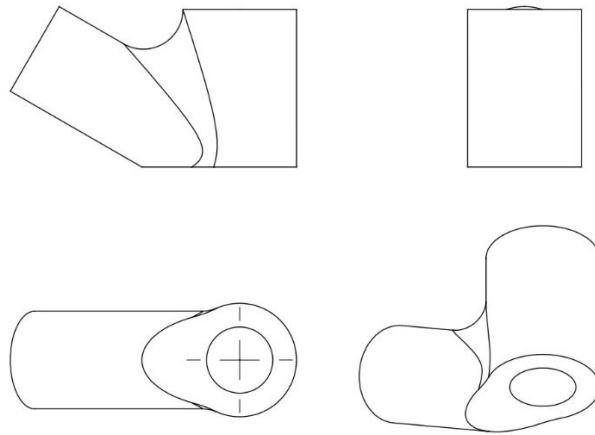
CAD orthographic drawing for tail support at fuselage
